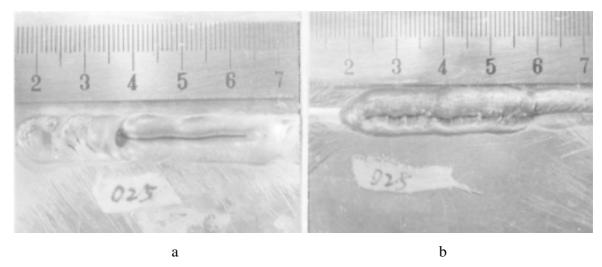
Photographs of the weld bead when a cutting process occurs with the constant mode: (a) front side; (b) back side
